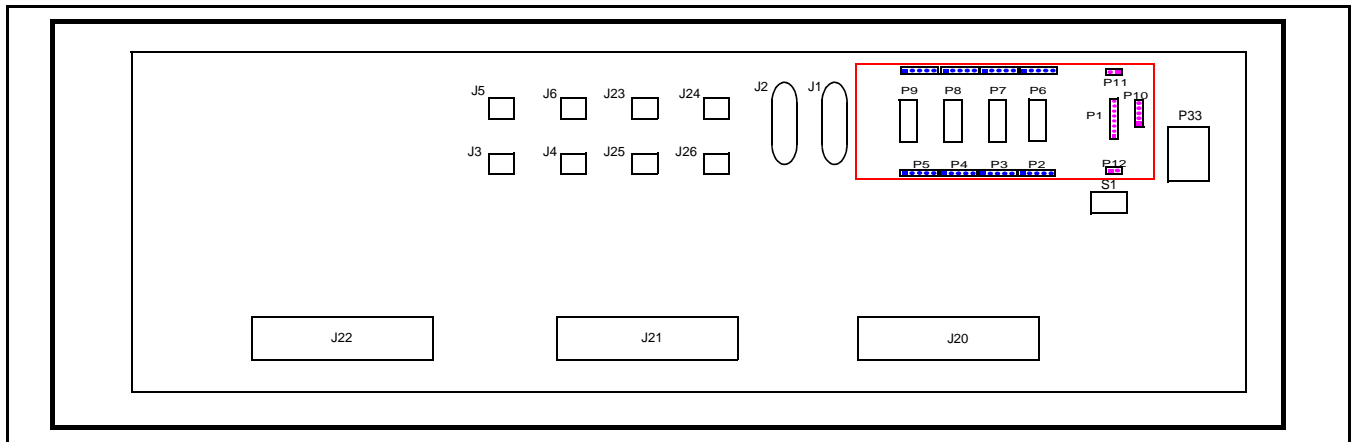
BASIC BOARD BACKPLANE WIRING LAYOUT
